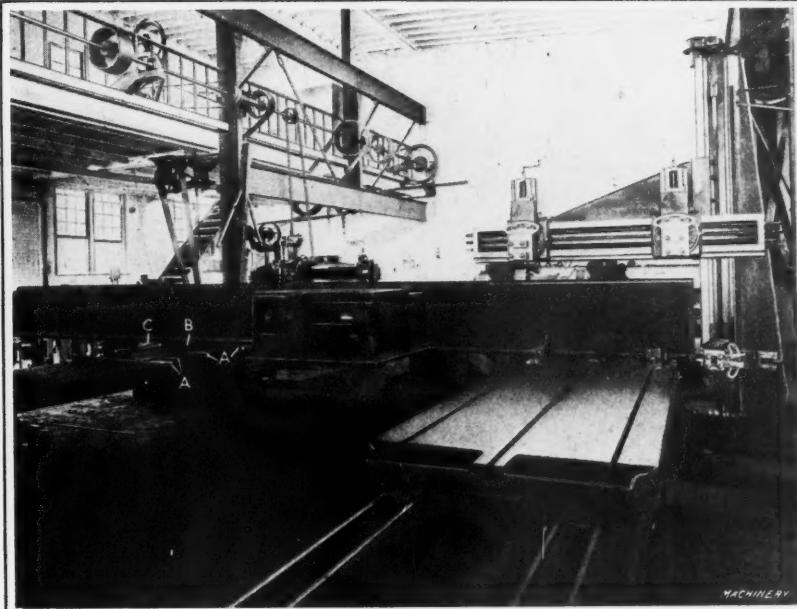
Use of an Open-side Planer for facing the Ends of the Middle Section of a Three-piece Planer Bed
